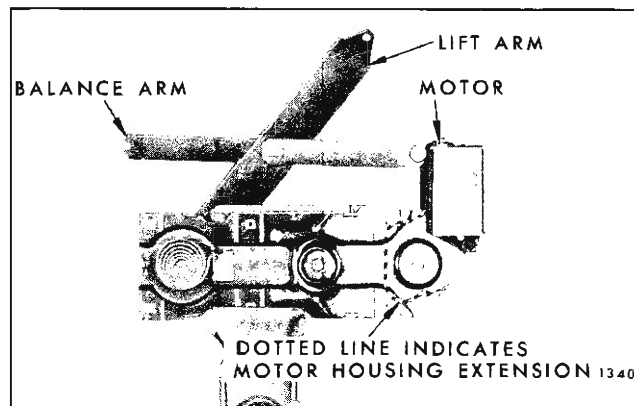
D42—Door Window Regulator and Electric Motor Assembly
